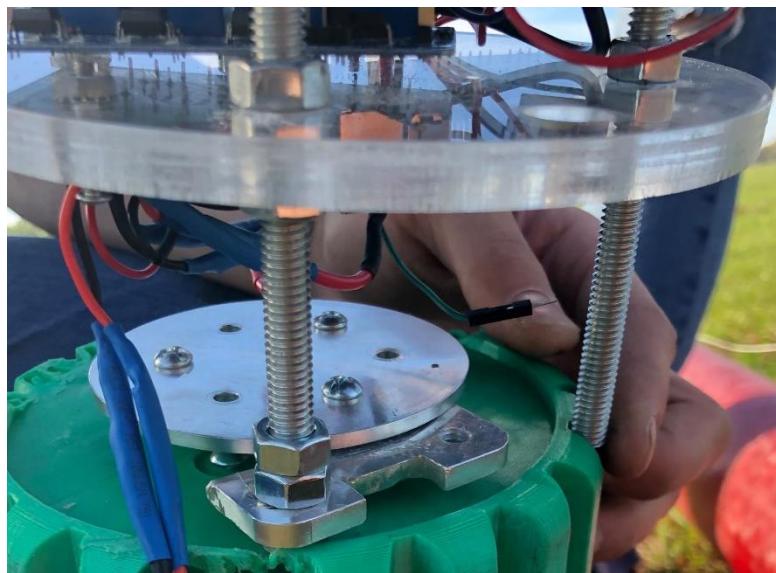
Attachment is made by a sliding a hooked piece mechanism underneath the wheel cap which is bolted to the rover.
